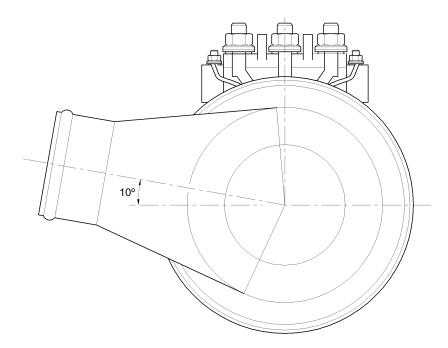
Angular Position of Air Inlet - Models 23085-029 and 23085-030
